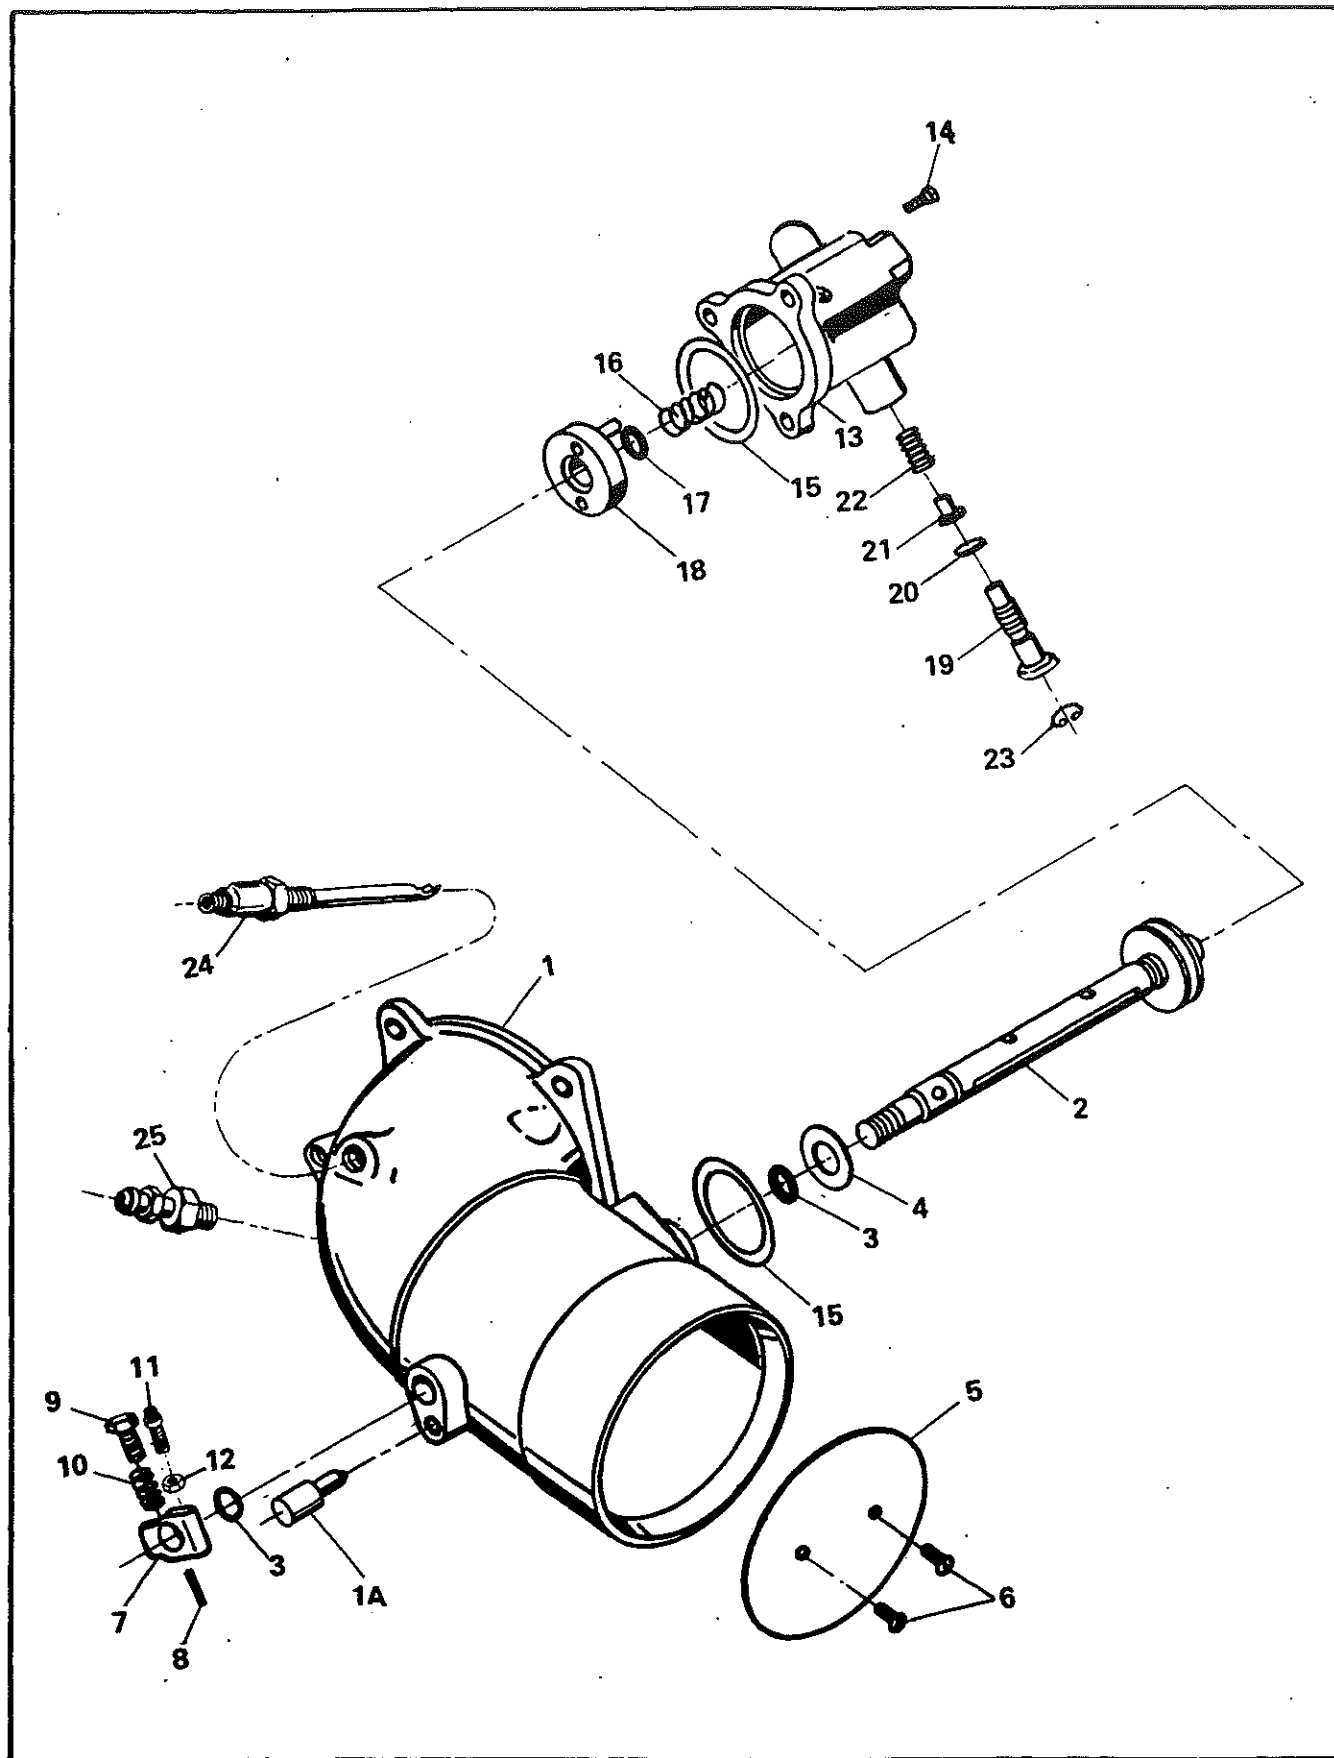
AIR THROTTLE AND FUEL METERING ASSEMBLY.
